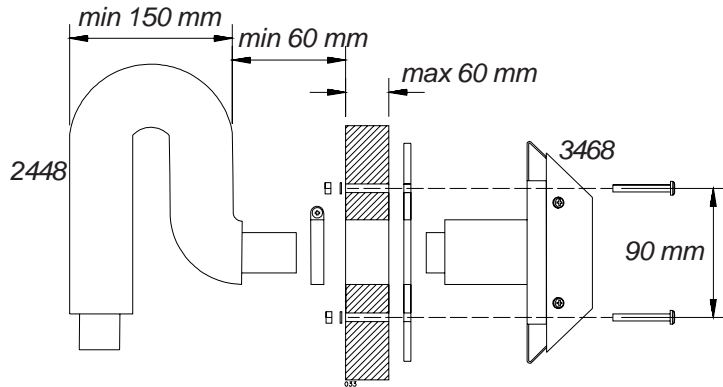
Hull lead-through 2467 installed. The installation opening is  $\varnothing$  50 mm and the screw holes are 4 x  $\varnothing$  6 mm.
